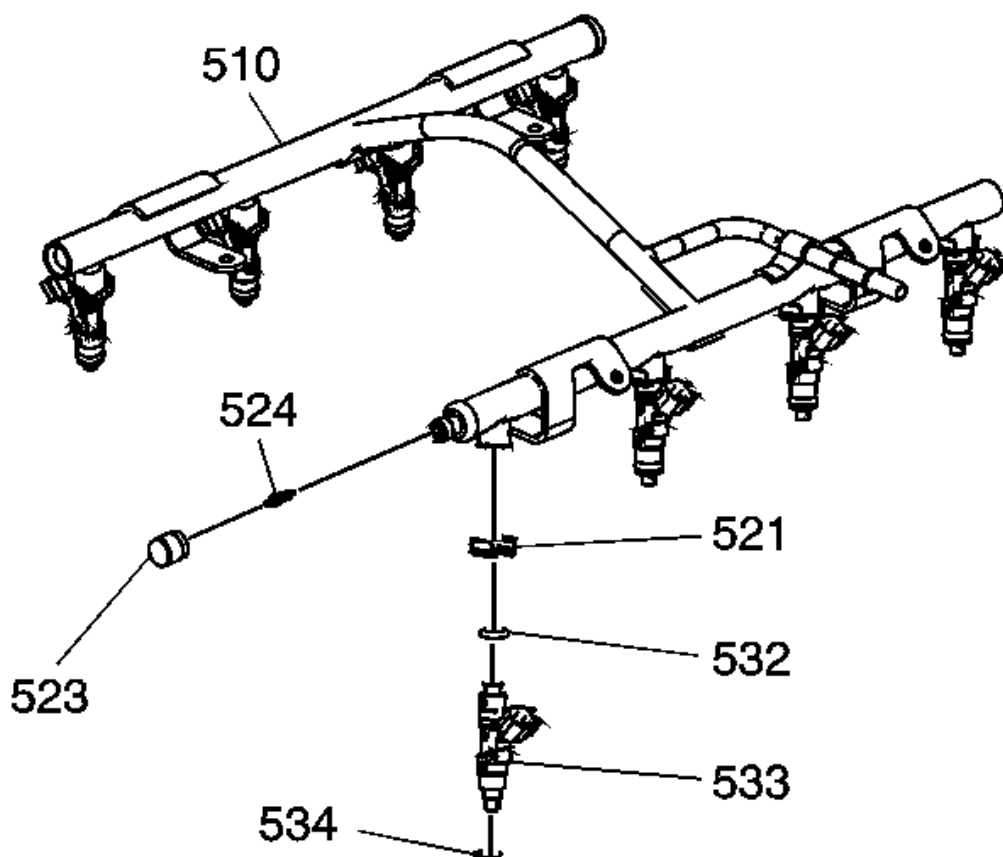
Fuel Injectors, Retainers, O-Rings, Cap & Service Valve
